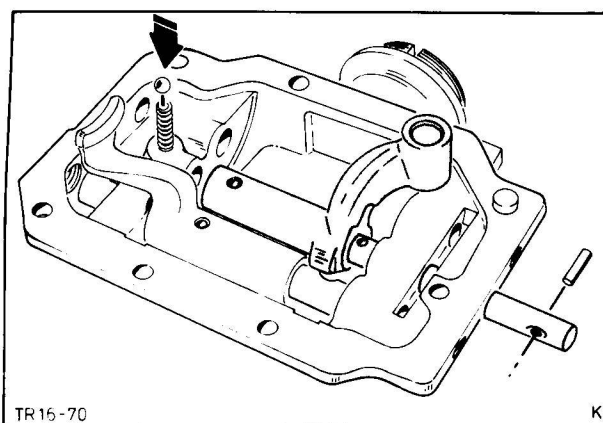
Fit 3rd/4th gear selector rail and fork carrier
